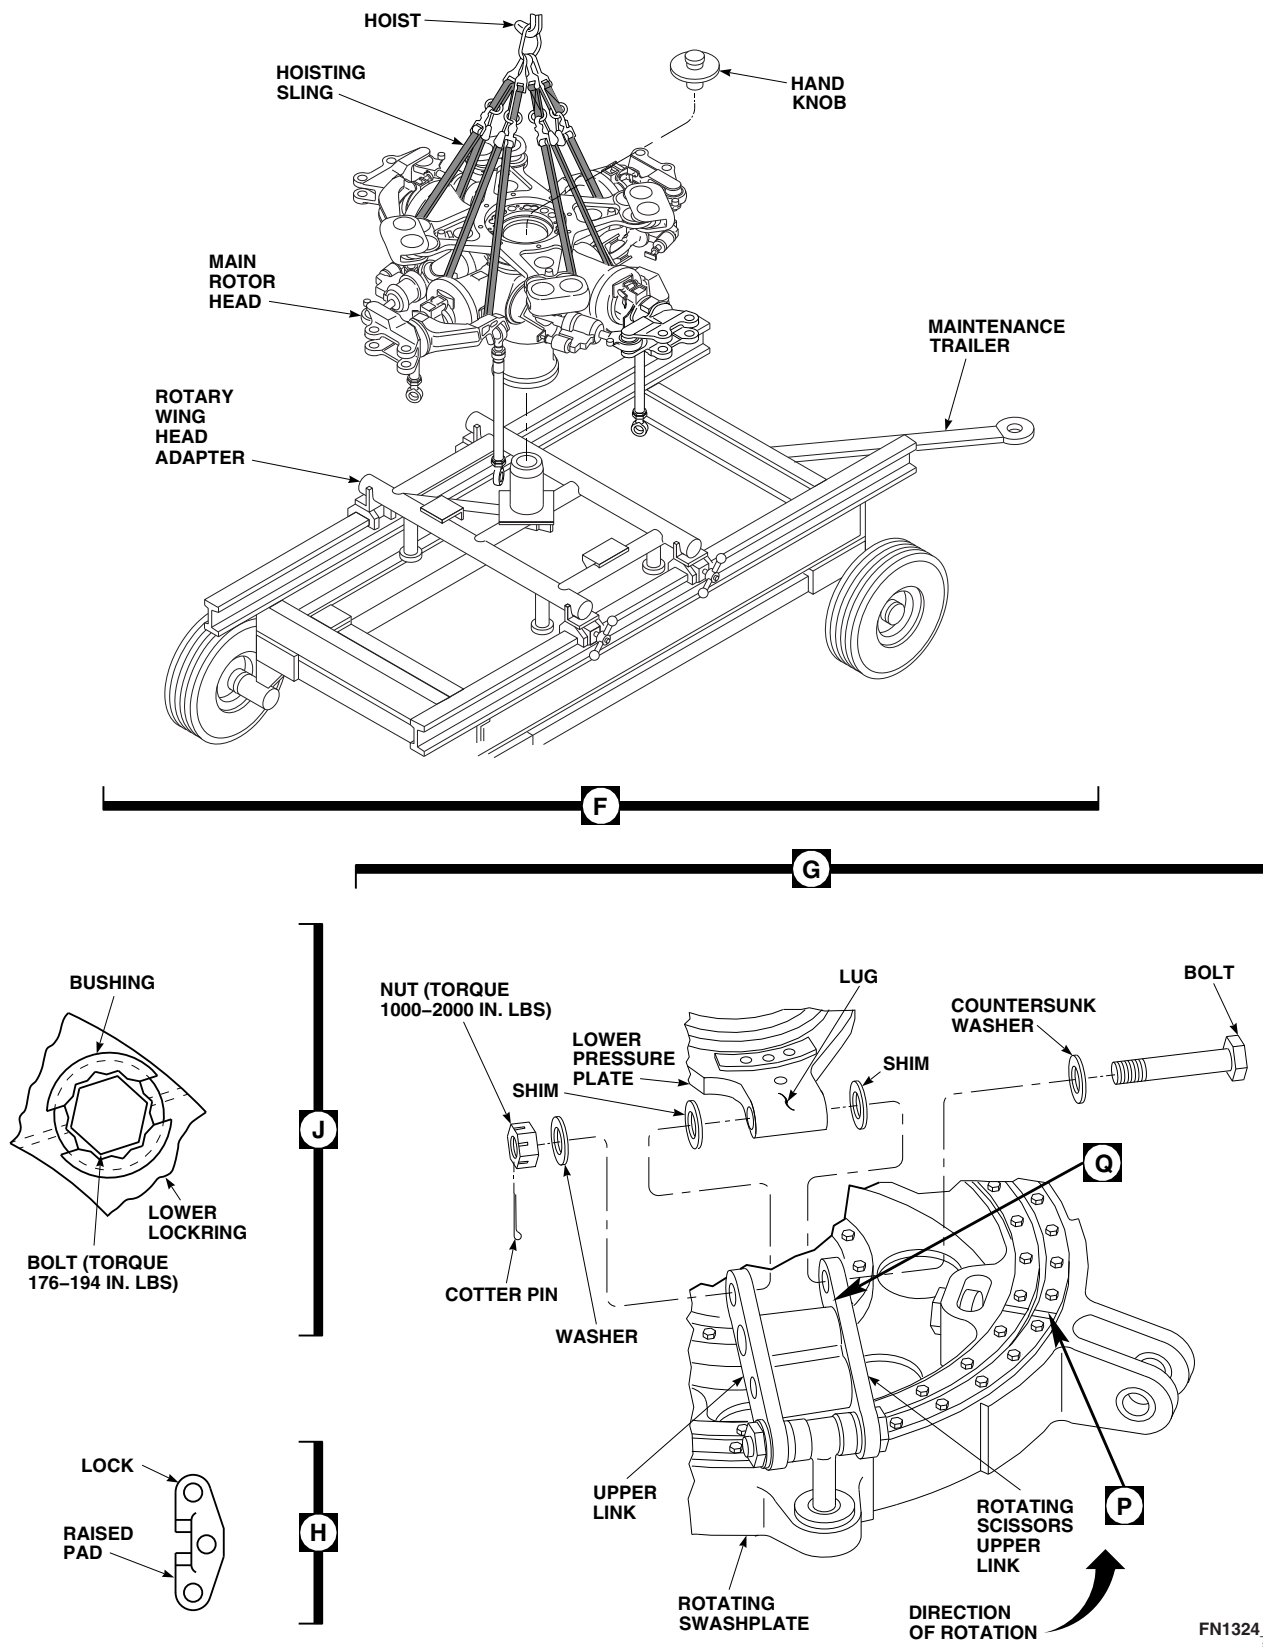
REPLACE MAIN ROTOR HEAD AND SHAFT EXTENSION (SHEET 3 OF 5)
